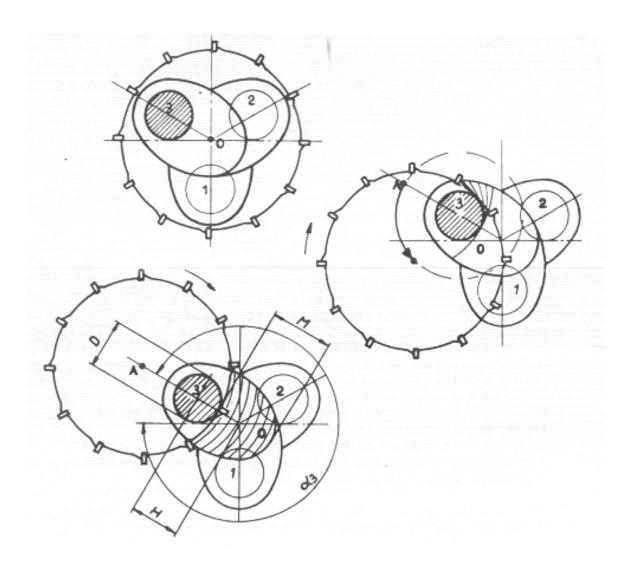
Internal Crankshaft Milling for One Bearing Diameter.
